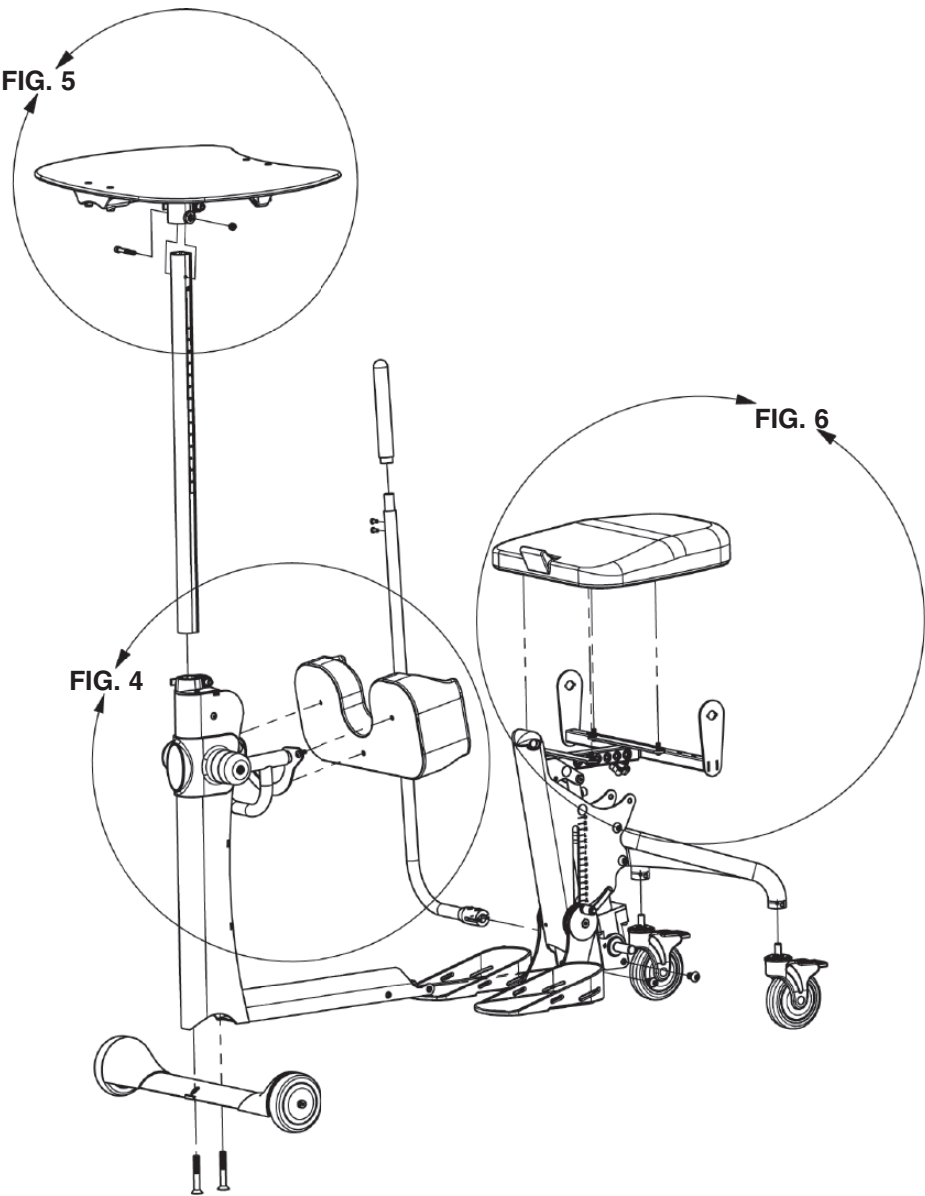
Attach the casters to the rear of the base, tighten using the wrench provided in the tool kit, do not overtighten.
